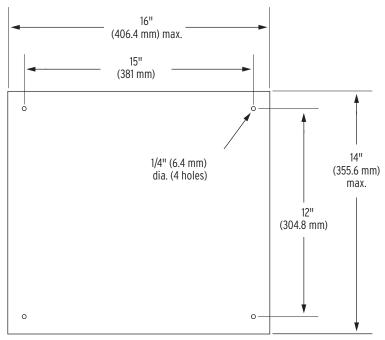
Recommended Dimensions and Drill Plan for User-Supplied Accessory Panel
